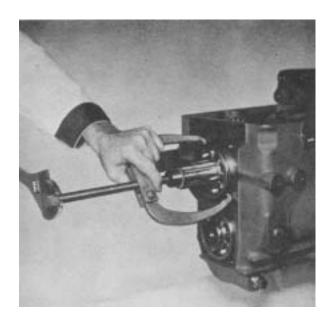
Pry mainshaft to the rear to expose rear bearing. Remove bearing.
